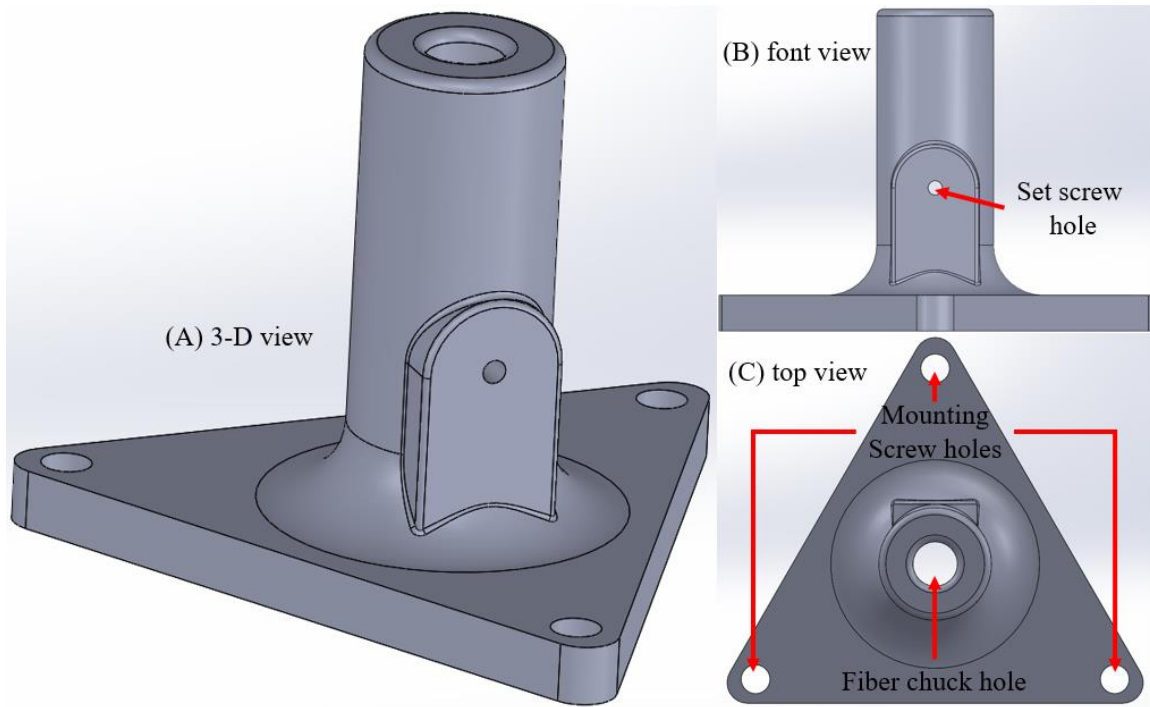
3-D Printed Optical Fiber Chuck Holder
